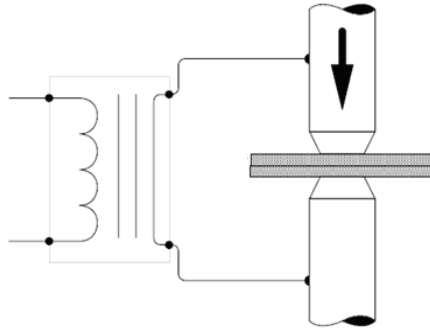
Schematic principle of spot welding from [BLO 01]
